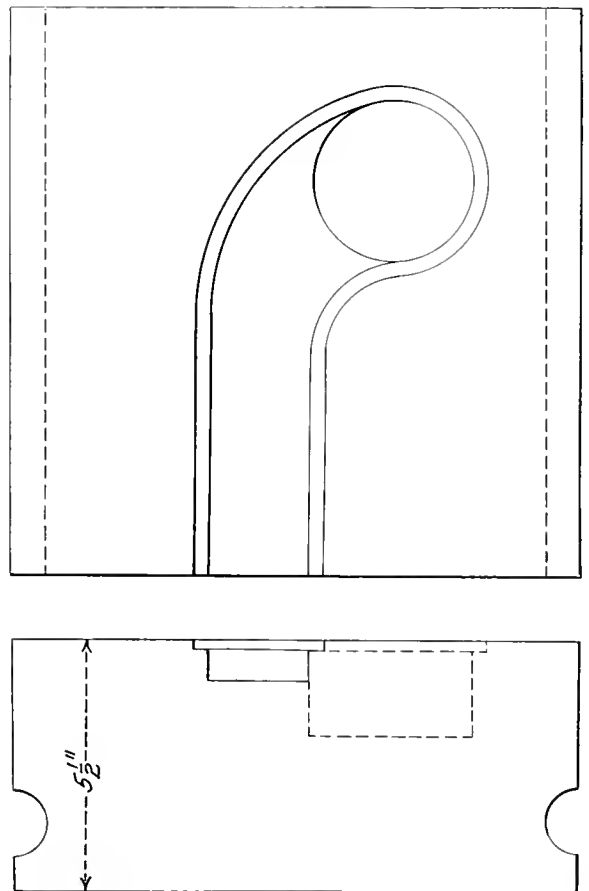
Hammer Dies for Making Valve Rod Ends; Central of New Jersey.
